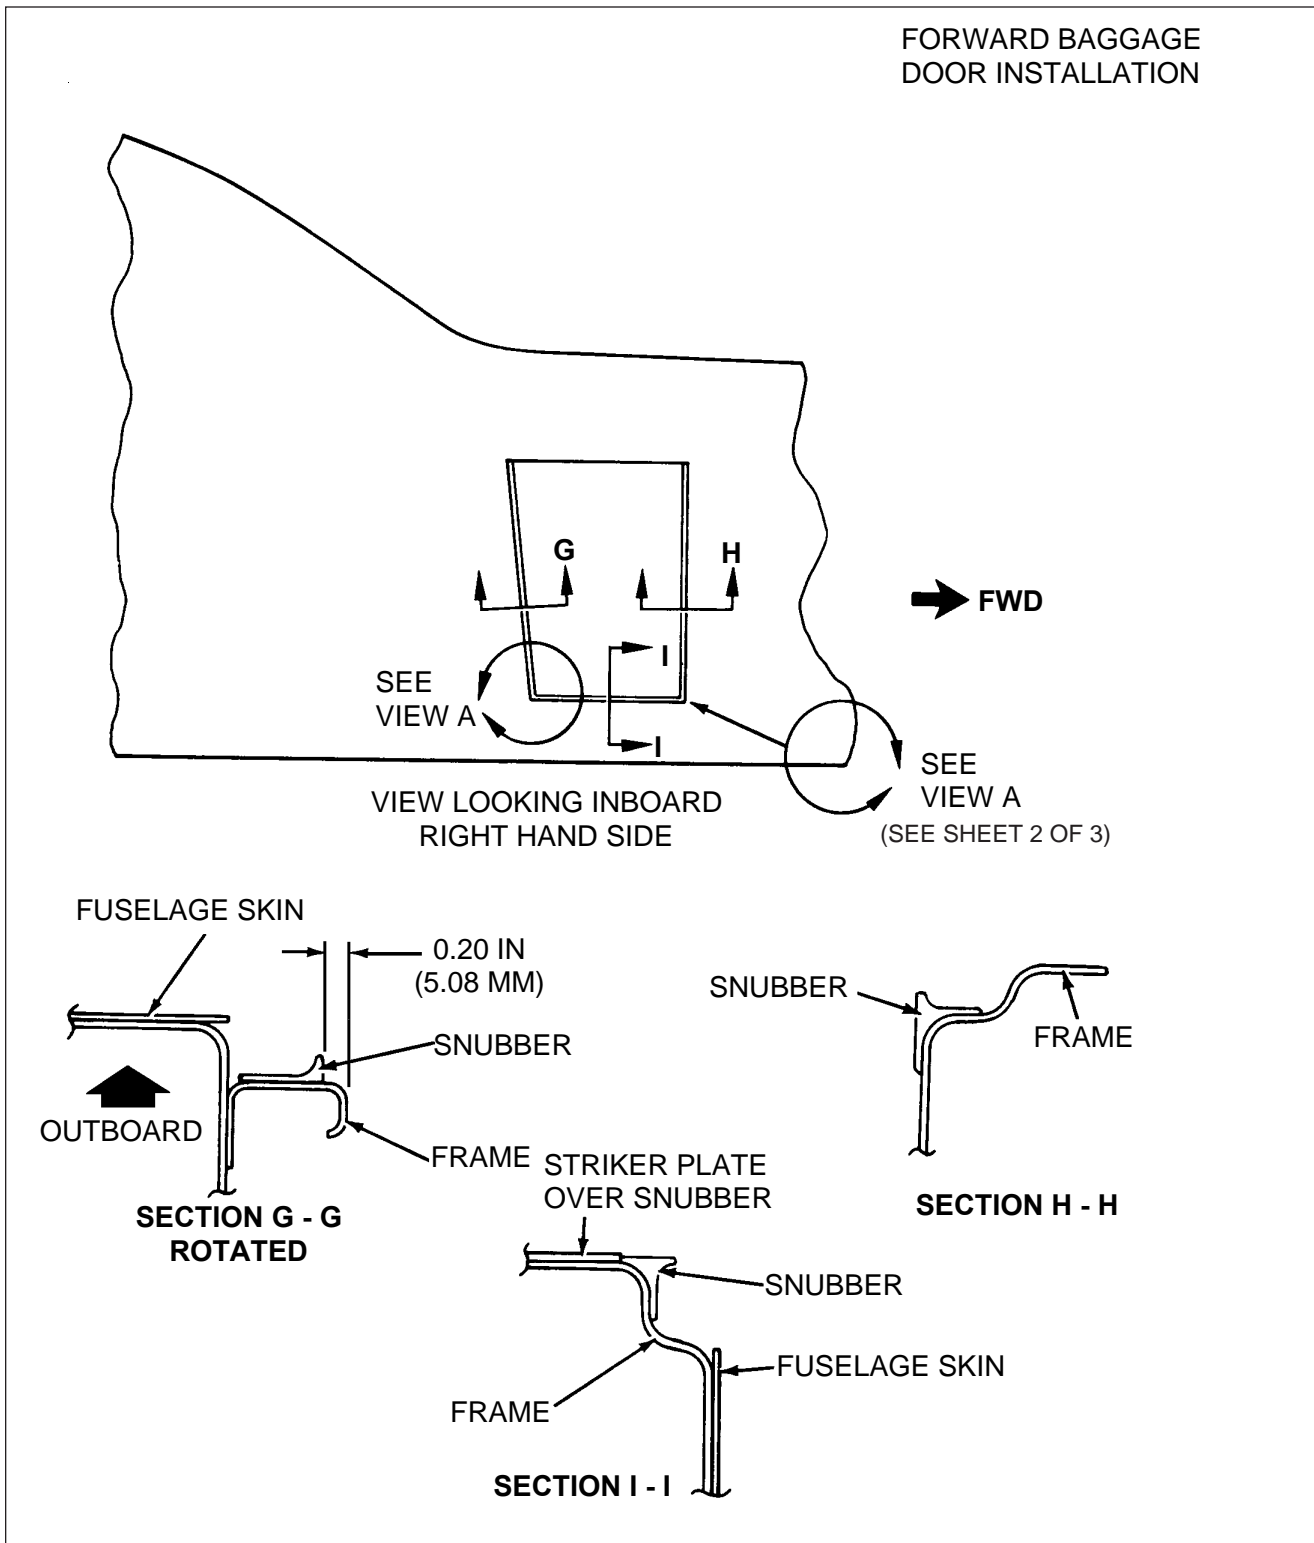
Snubber Installation - Forward Baggage Door (Sheet 3 of 3)
